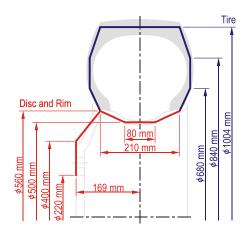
Dimensions of the cross-section of the truck wheel FE model
